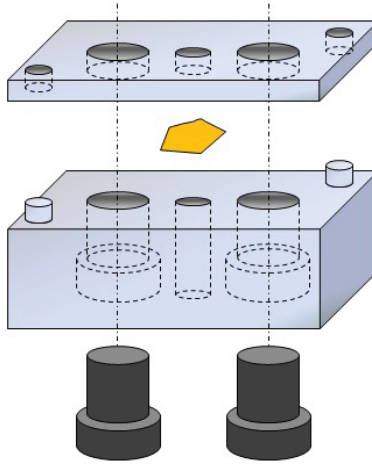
Schematic illustration (exploded view) of the jig used for clamping the film (test-specimen). The fixture consists of two plates that are held together by small recessed hex screws. The film is sandwiched between the two plates to create a clamped circular free-standing plate.
